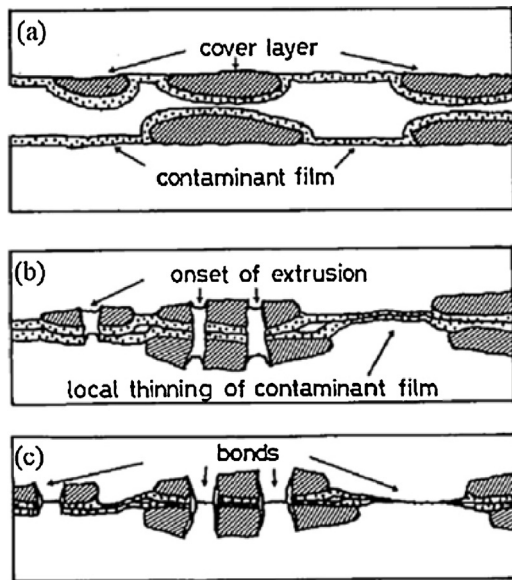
Model for bonding mechanism in cold welding. (a) Scratch brushed surface, (b) extrusion of virgin material and (c) bonding [164].
